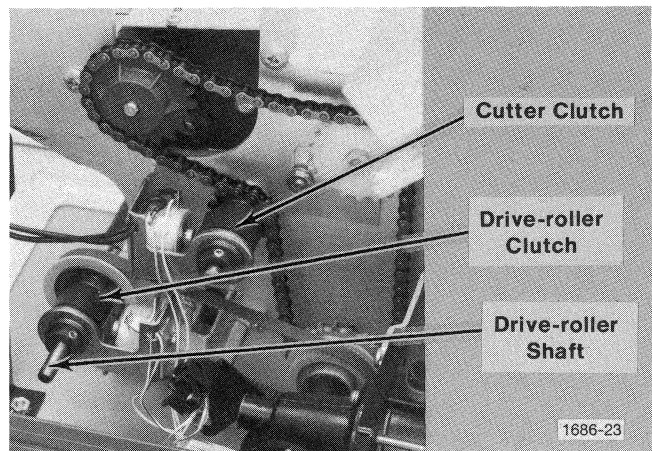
Clutches with interrupter bracket and interrupter wheel removed.
